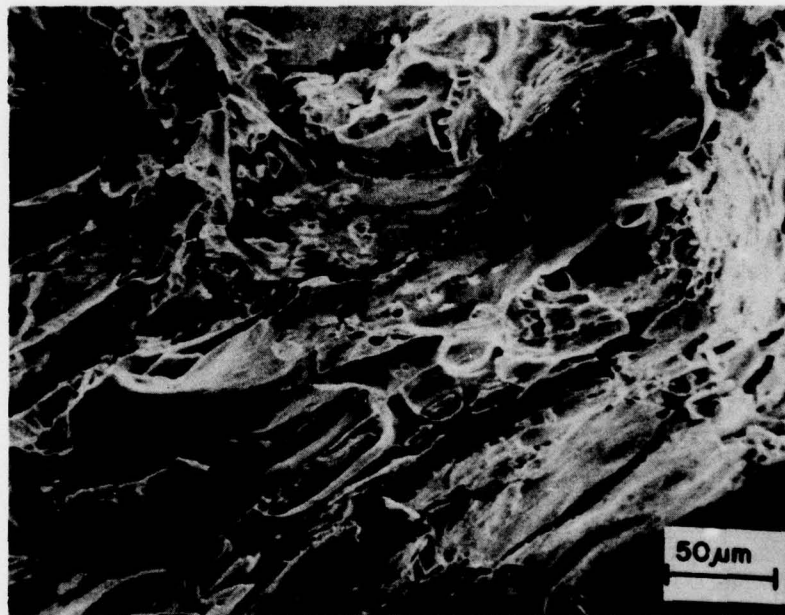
Ductile fracture surface of specimen fractured by impact at 273 K (32F). Specimen 0404B.
